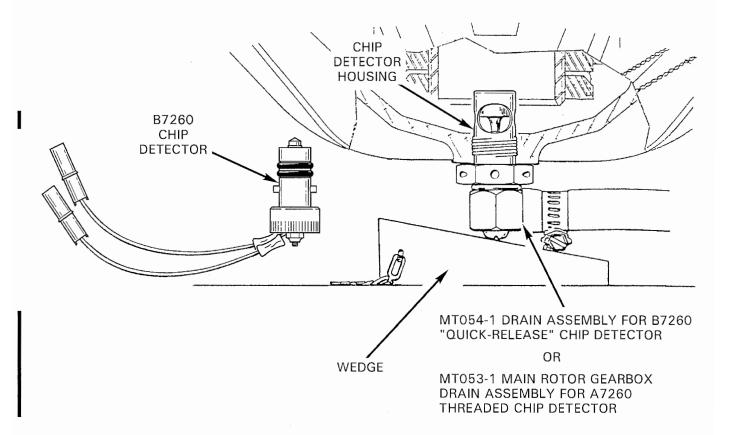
DRAINING MAIN ROTOR GEARBOX
